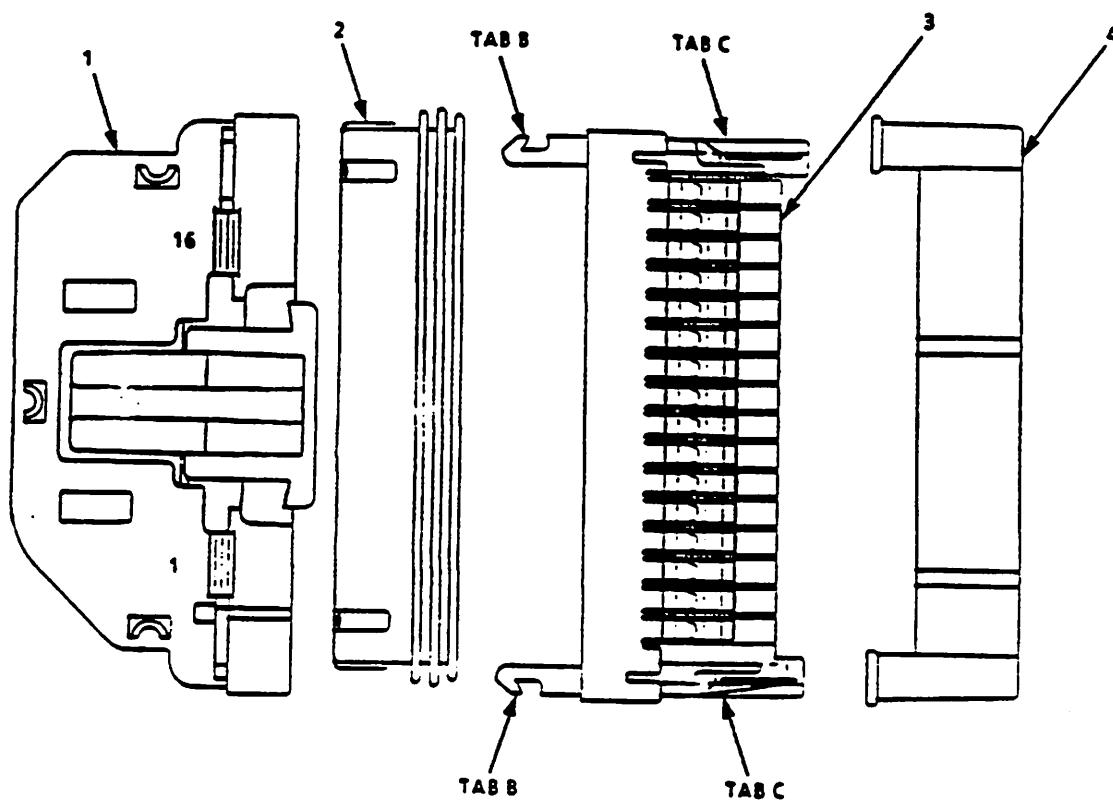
FIGURE A - EXPLODED VIEW OF CONNECTOR ASSEMBLY
